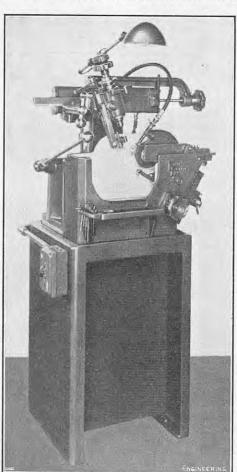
Flute Grinder; E. P. Barrus (Concessionaires), Ltd.
